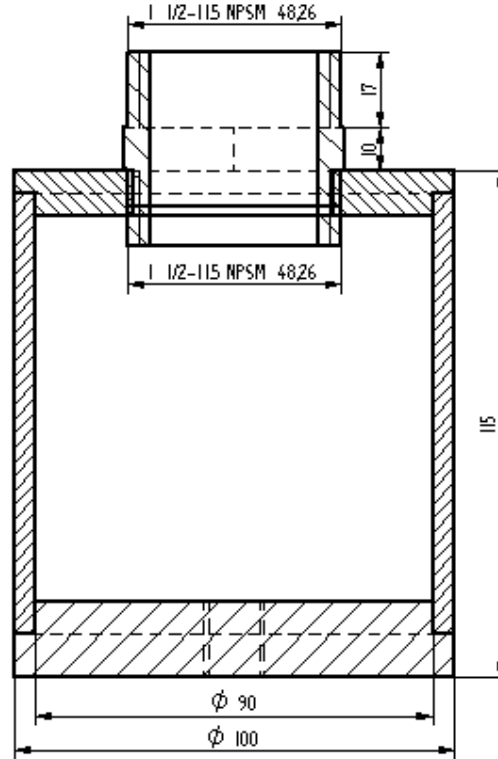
Technical Drawing of the Cooling Water Distributer Apparatus, Front View.
